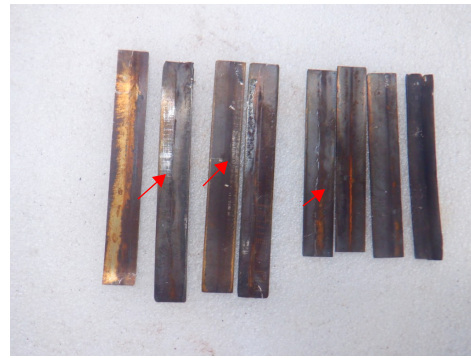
Fretting,deformation and corrosion on seals which require replacement with new.
